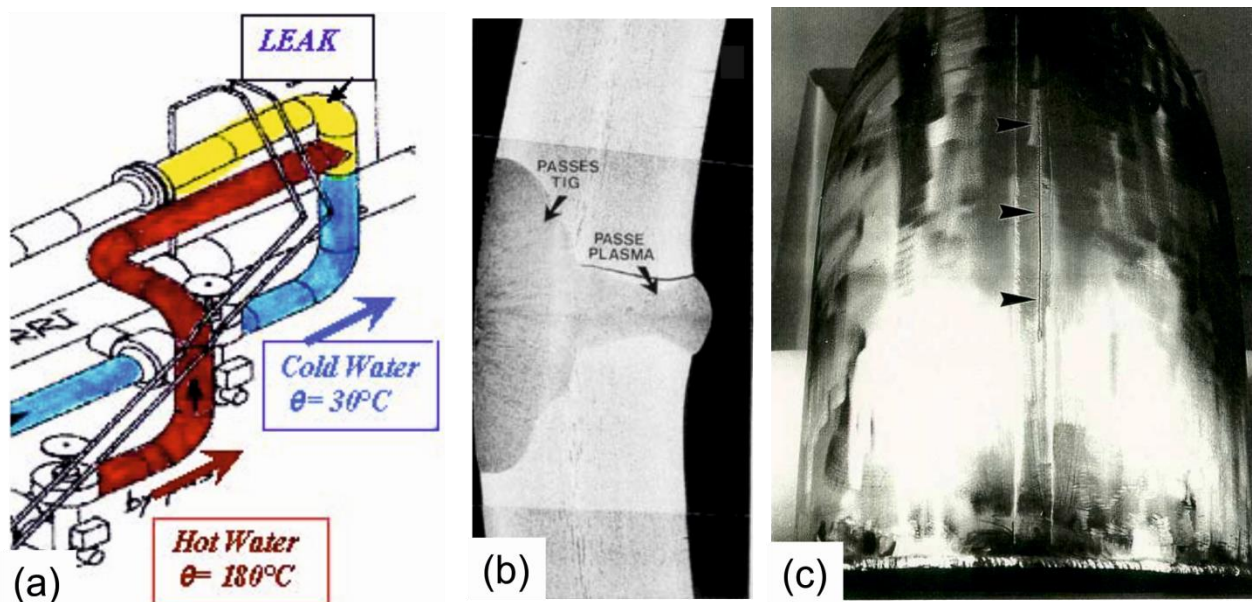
Civaux T-junction [26] (a), its through-wall crack [26] (b) and longitudinal crack [25] (c)
